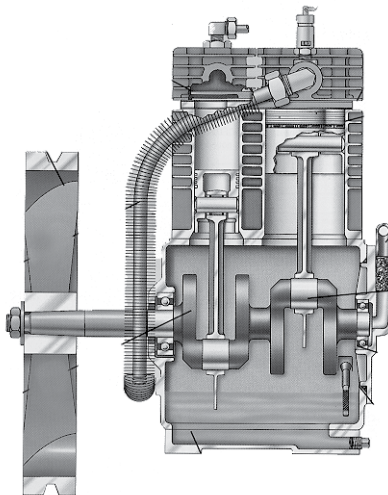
Air-Cooled, Single-Acting Reciprocating Compressor
